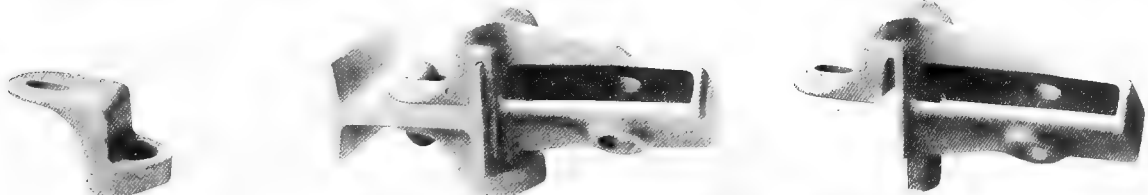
Two-Piece Adjustable Brake Beam Fulcrum. (Patented.)
